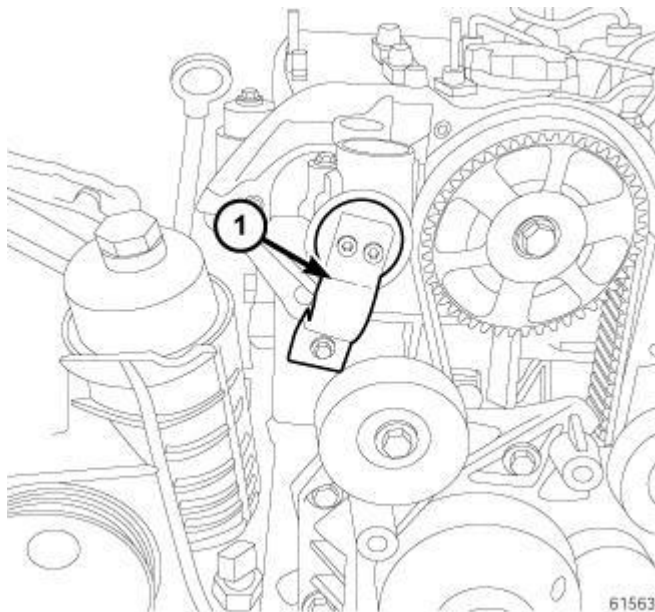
CAMSHAFT LOCKING TOOL INSTALLED
